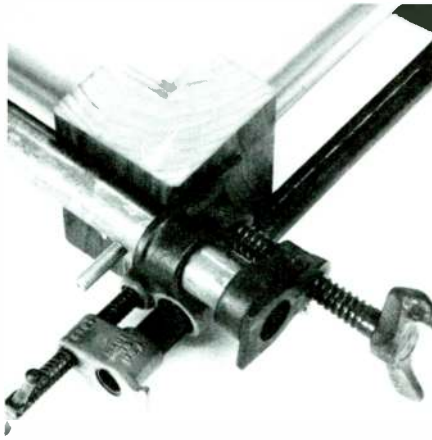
Using pipe clamps to increase clamping pressure on the corner clamping assembly.
